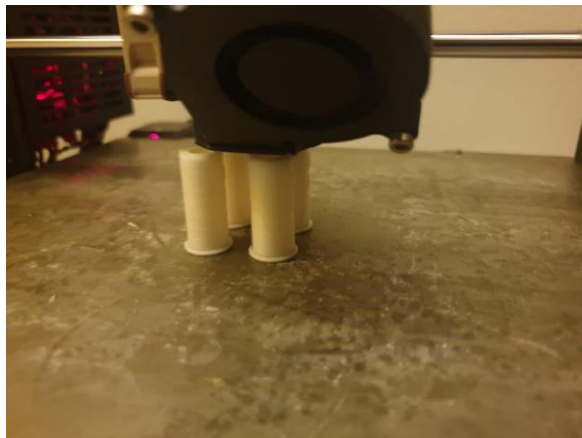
The 3D printing method of 3 models of Anchor drywall.
